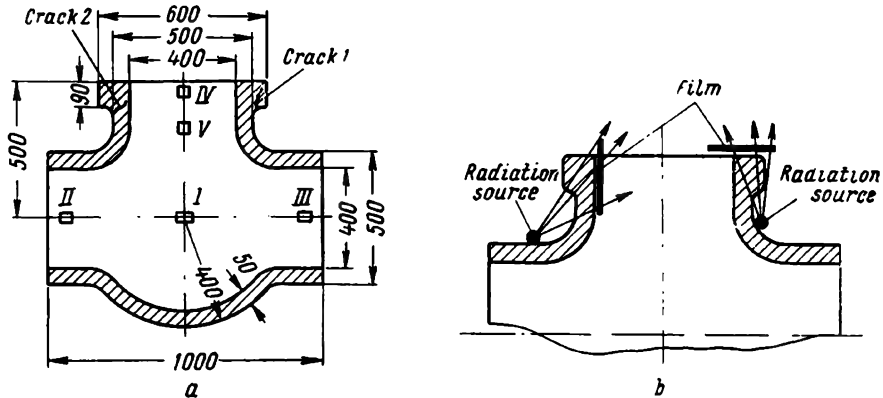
Exposure set-up adopted to radiograph a cast tee-piece (*a*) and arrangement of film holders (*b*) to detect cracks near flanges of the tee-piece
